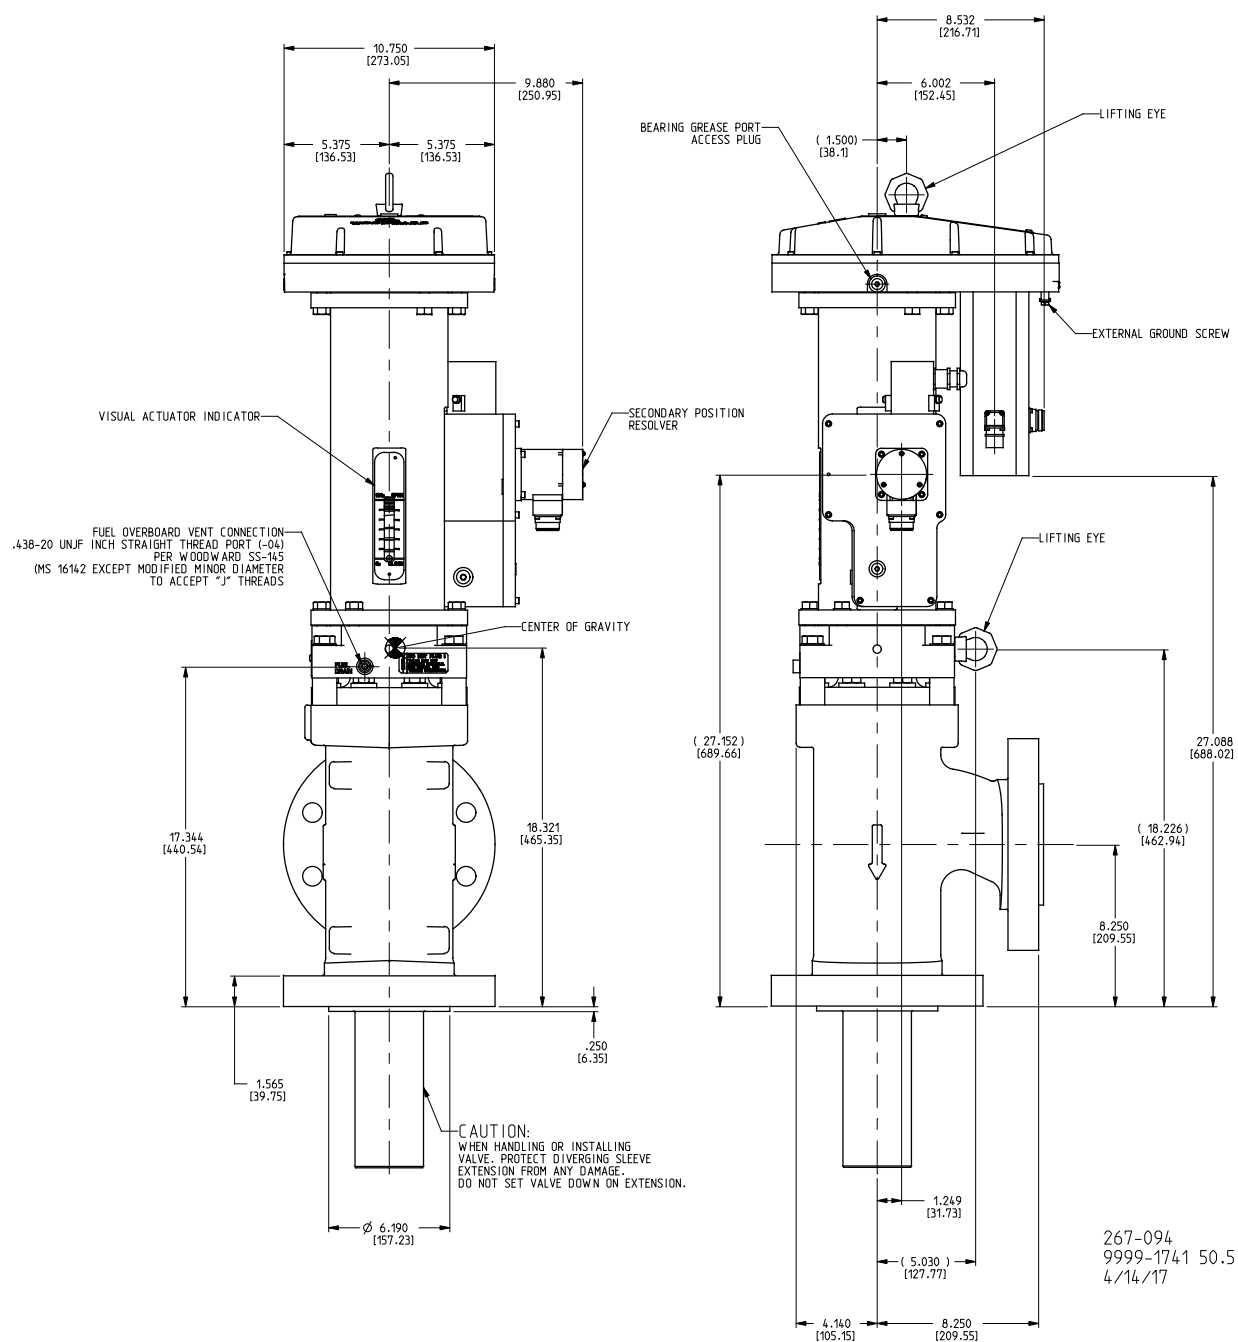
Outline Drawing (4-Inch UHR LESV)
